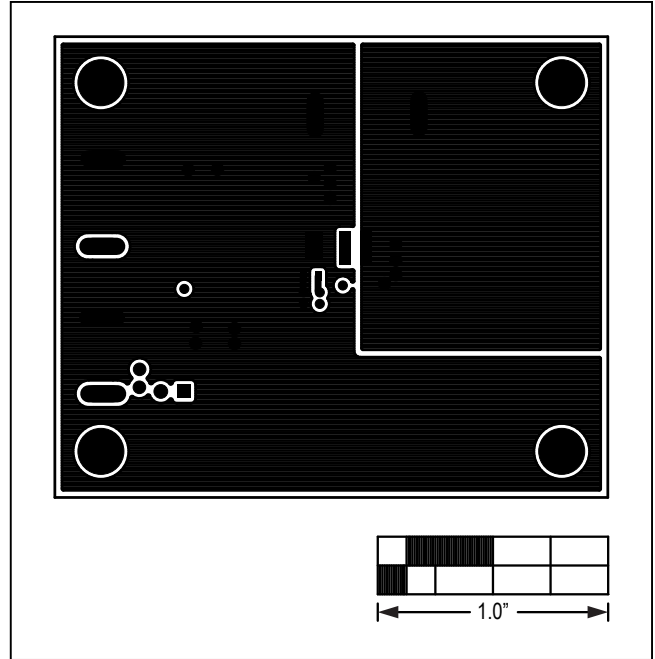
MAX17515 EV Kit PCB Layout—Solder Side
